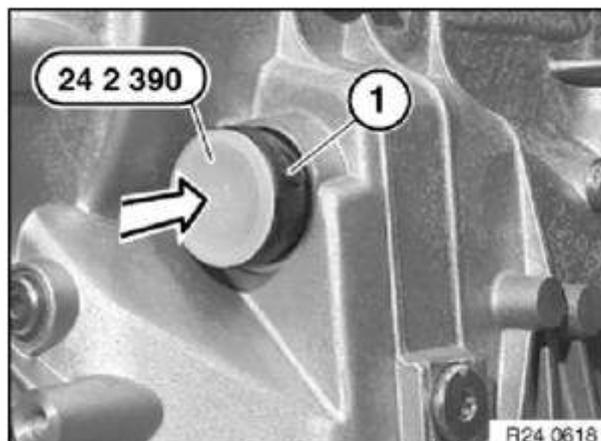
Inserting Special Tool (24 2 390) In Sealing Cup
